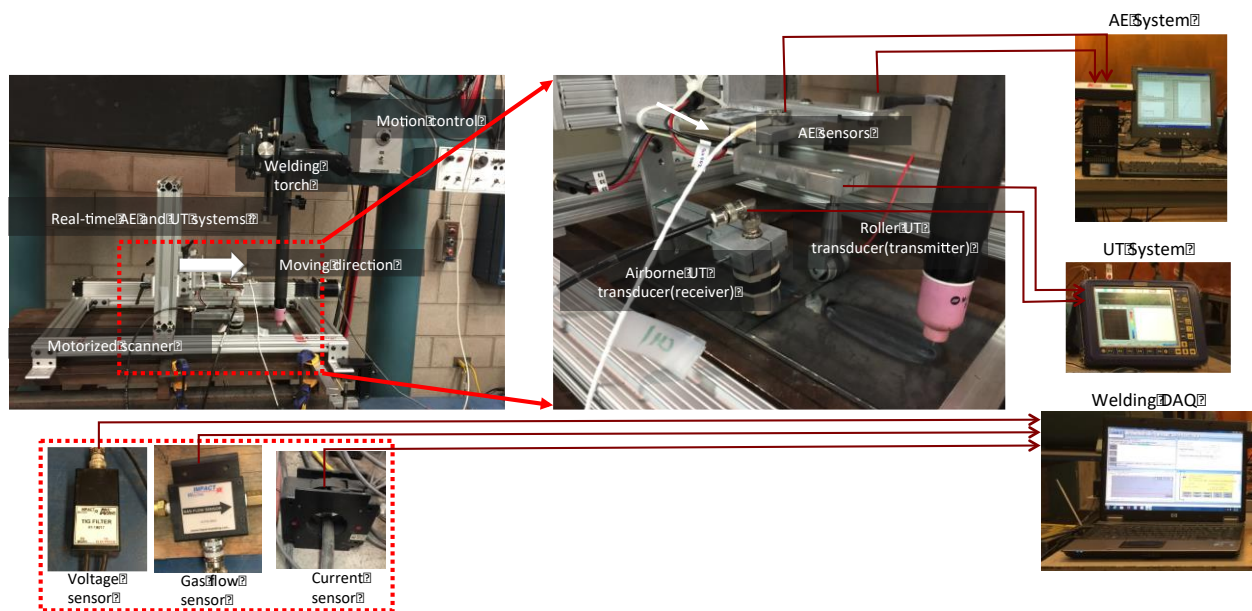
Components of portable welding inspection tool and other welding sensors.
